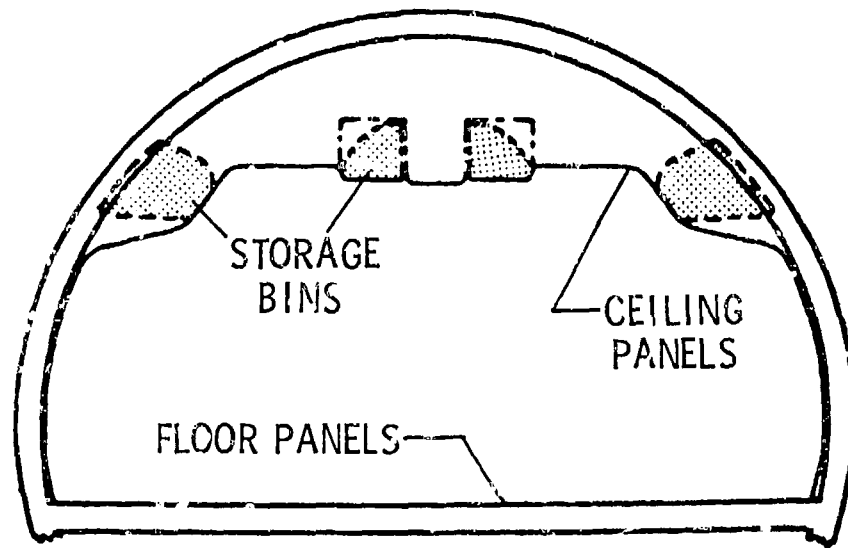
Ceiling Panels and Overhead Storage Bins
